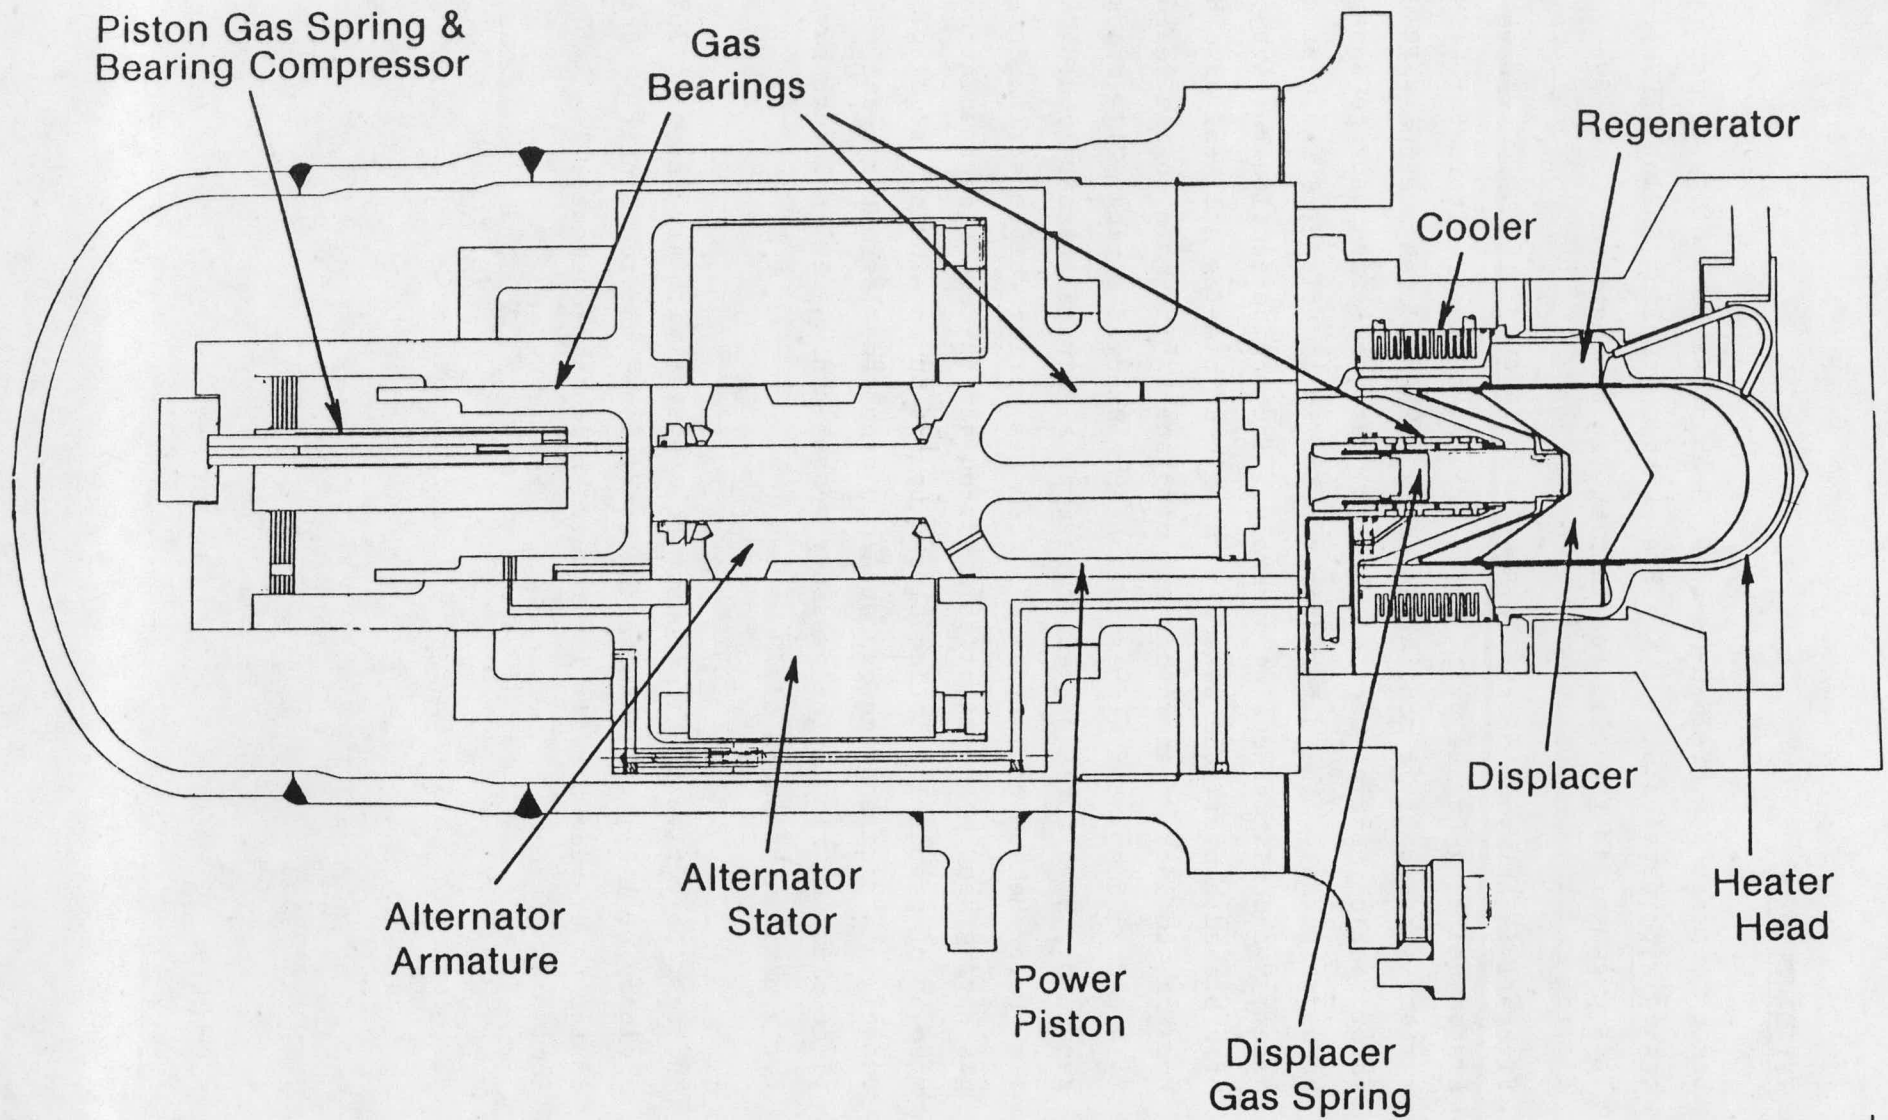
is a layout of the demonstrator system. The test hardware is a Free-Piston Stirling Engine prime mover driving a linear alternator. The demonstrator system is basically a modular assembly. The modules are the reciprocating alternator section, engine section, heater head insulation package assembly, and the pressure vessel. The alternator section is comprised of the piston plunger assembly and piston housing assembly. The engine section has subsections made up of a brazed heater head assembly, displacer bearing and seal assembly, cooler housing, cooler, regenerator, and displacer. The main engine features include: 1) a posted displacer with a variable volume gas spring; 2) a stacked screen regenerator; 3) a three segment tube type electrical heater head; 4) a counter-cross flow water-helium cooler; 5) a ported gas spring compressor integral with piston gas spring; and 6) an adjustable piston gas spring. The insulation package is made up of precut insulation blocks housed in an aluminum housing. The pressure vessel is a single piece cap attached over the alternator section with a single piece clamping ring. The pressure vessel and engine enclosure have been designed for a maximum pressure of 70 bar.
